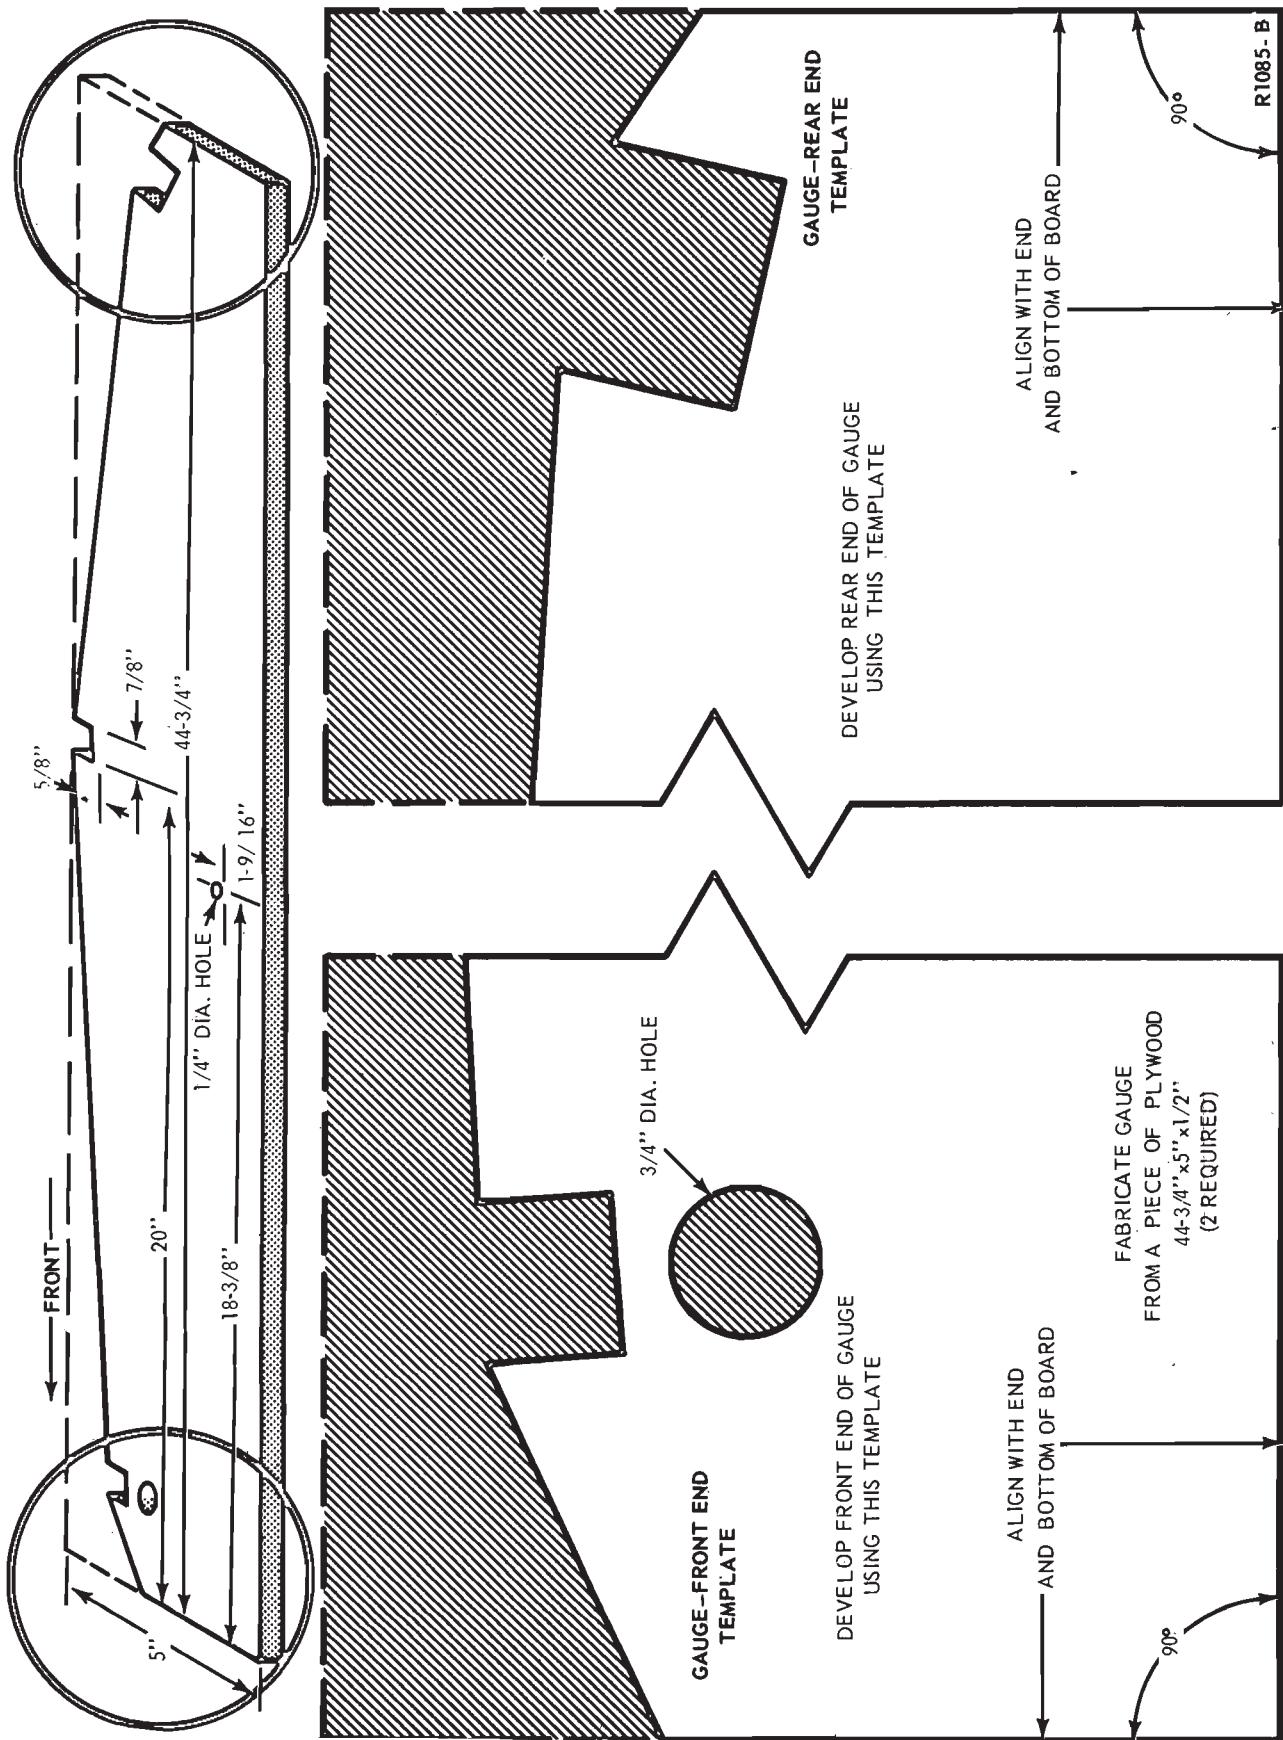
Bow Locating Gauge Fabrication—Ford, Meteor, Mercury
